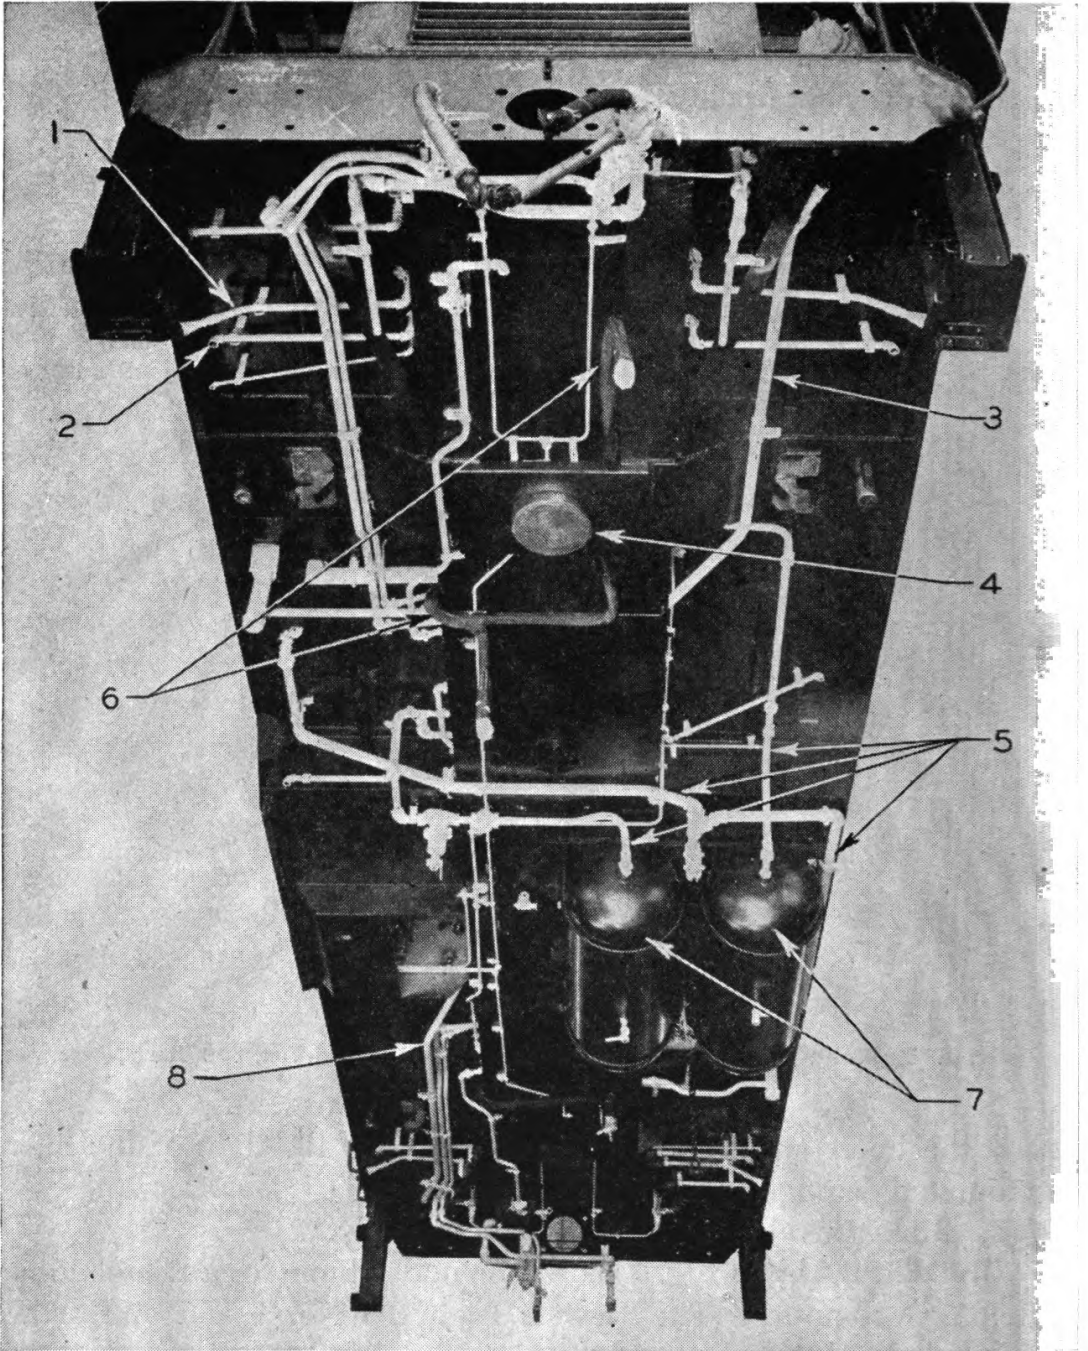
Diesel Locomotive Underframe. At 1, Radiator Water Overflow; 2, Water Drain; 3, Fuel Oil Line; 4, Center Bearing; 5, Air Pipes; 6, Motor Cables; 7, Air Reservoirs; 8, Fuel Oil Line.
